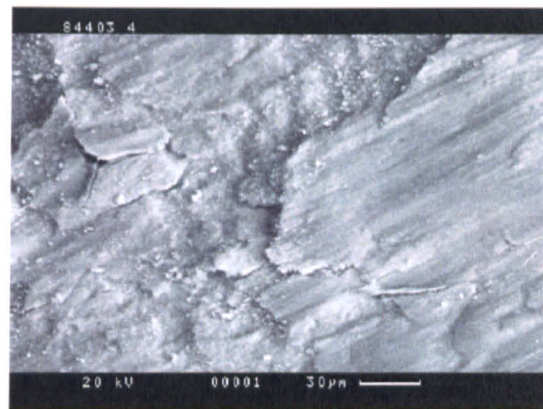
Fretting scar formed at the pierced sheet in contact with the edge of rivet head
